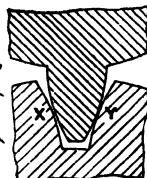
LEWIS'S ENGAGING GEAR FOR FRICTION GEAR.
